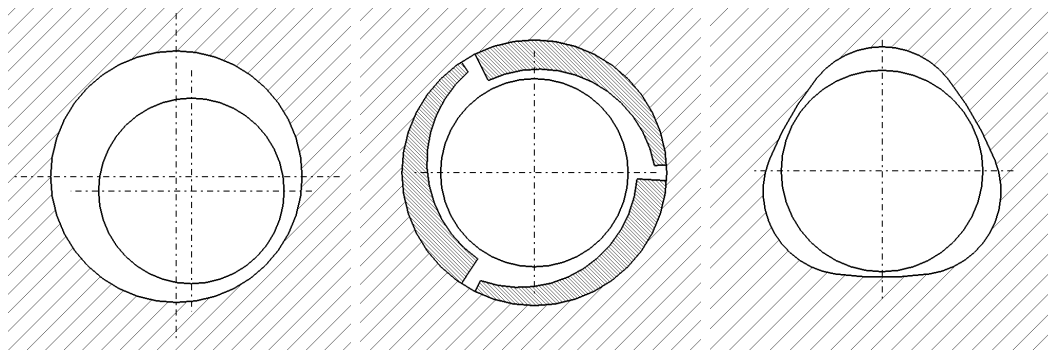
a) Plain Bearing, b) Fixed-Pad Bearing, c) Multilobe Bearing
